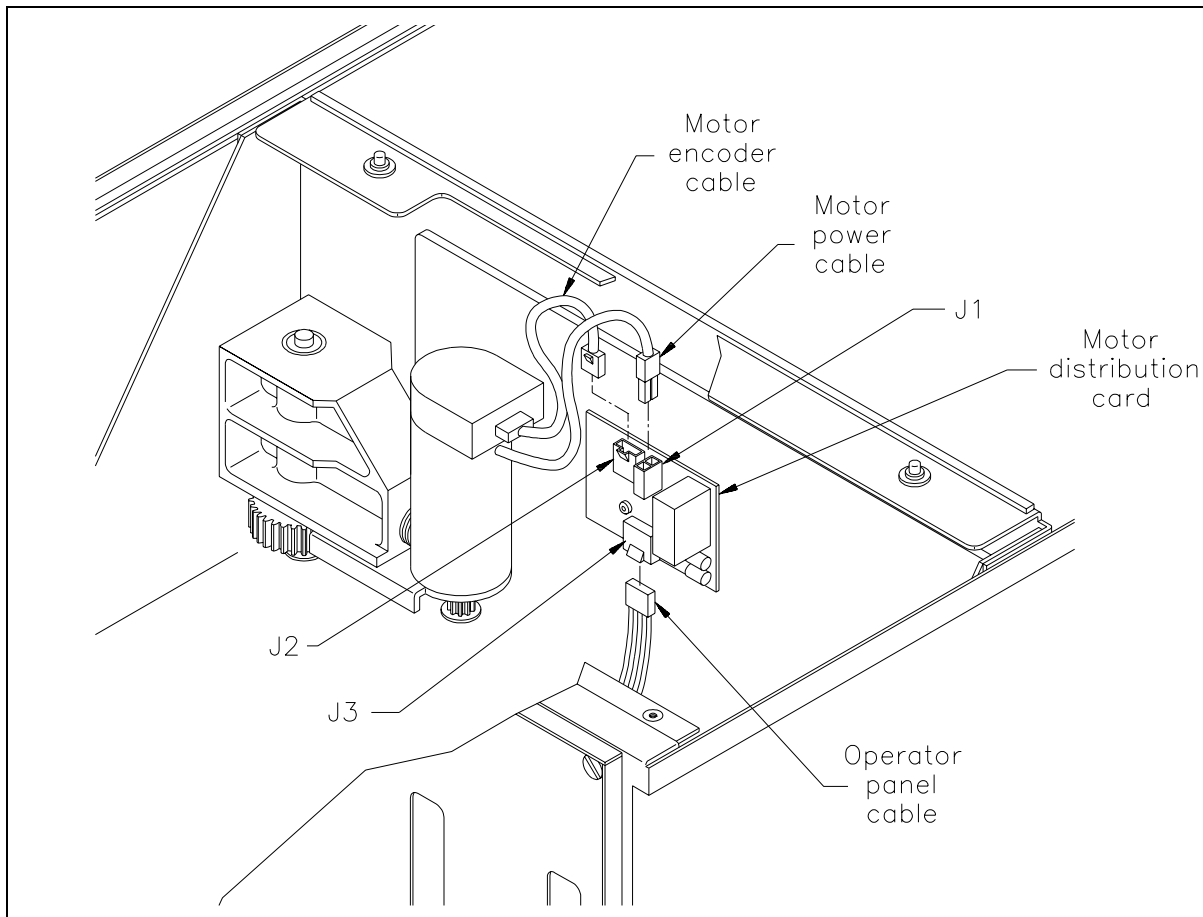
Disconnecting the operator panel cable from the motor distribution card
